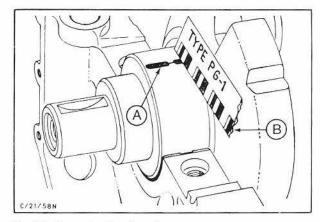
Measuring bearing play. A – Compressed plastic thread. B – Measurement scale.
